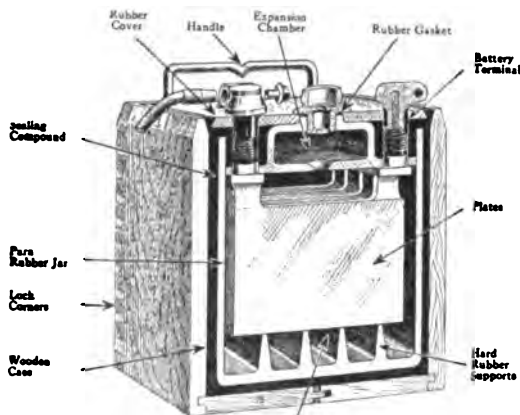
Sectional view showing location of the parts of a starting and lighting storage battery.
